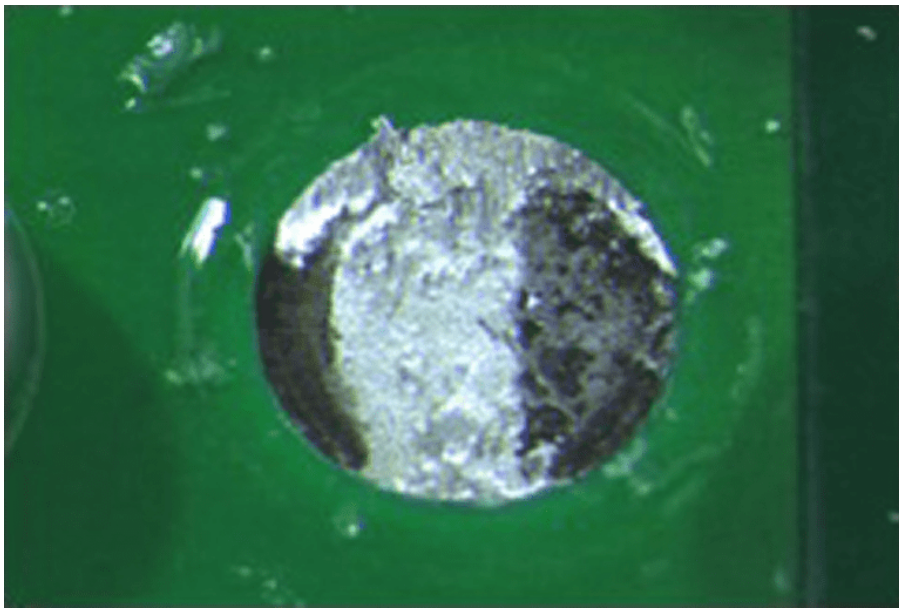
A die shear failure indicates weak bond strength between the solder and pad finish.
